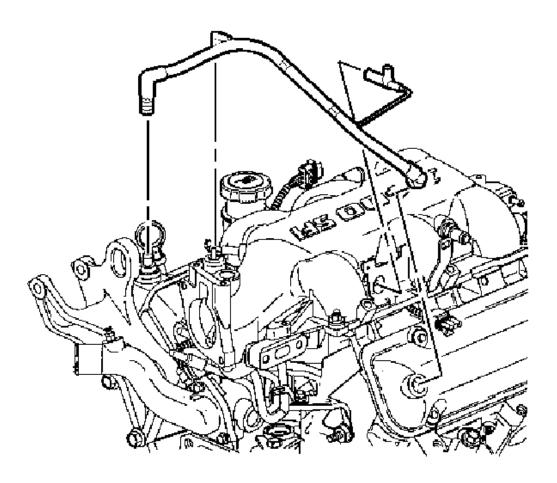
Removing Vacuum Harness Assembly Courtesy of GENERAL MOTORS CORP.
